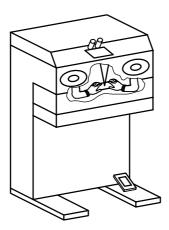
Fixed laser assembly, workpiece manually guided or manually positioned
